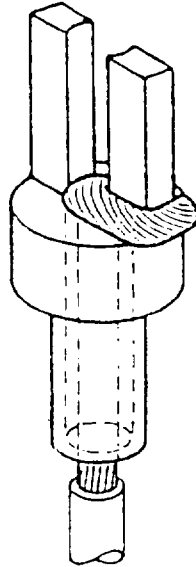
Bottom route terminal connection (see 5.3.21.6.2).
